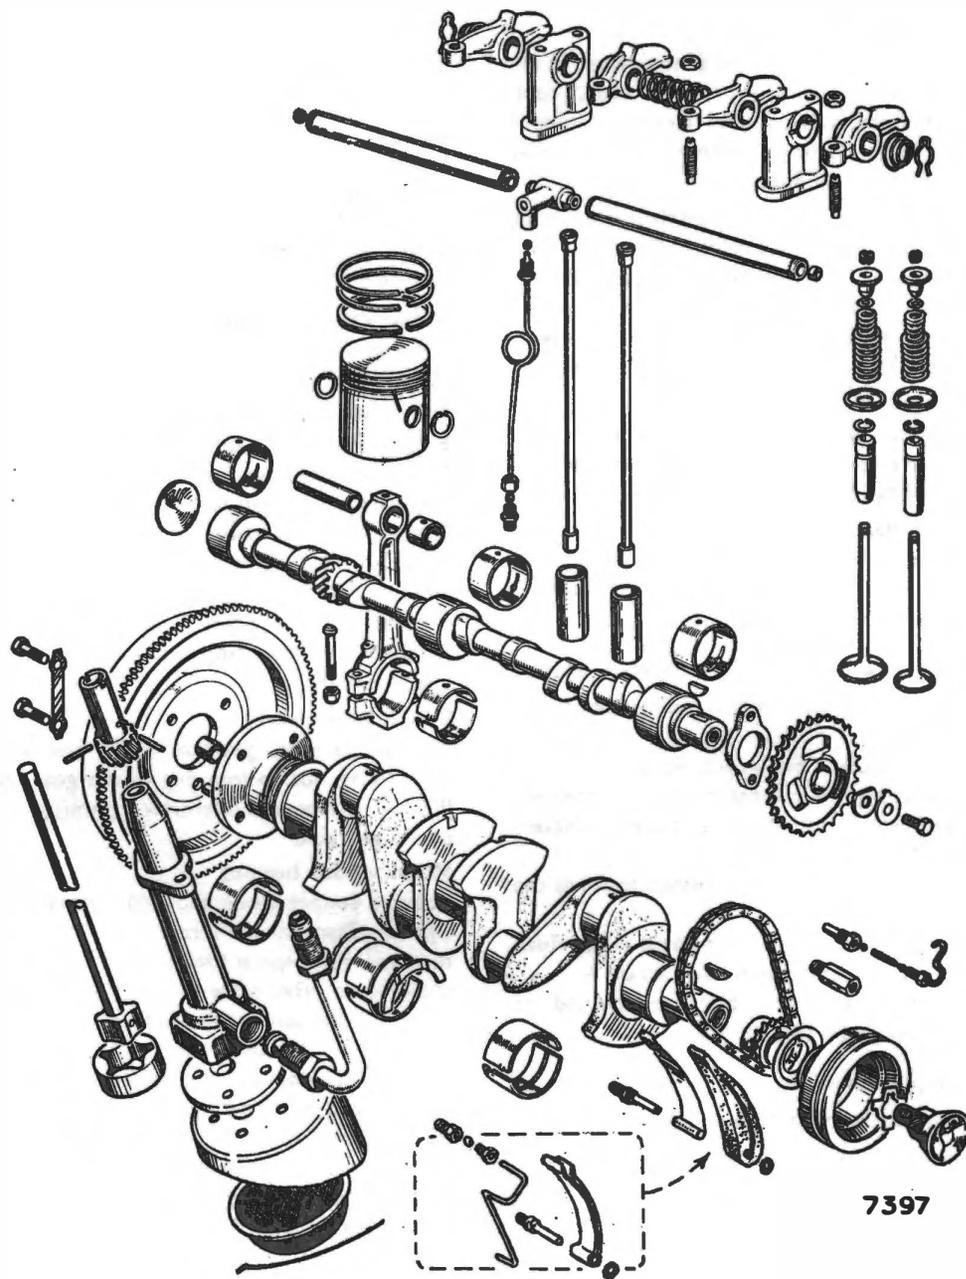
Exploded view of working parts (1494 c.c. engine shown)
